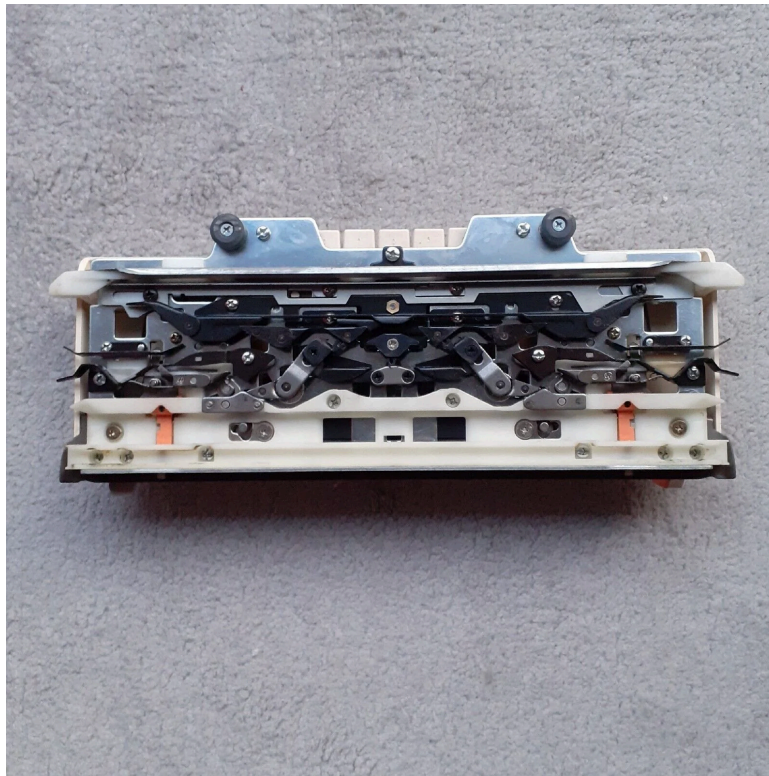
Underside of a knitting machine carriage, photo taken by knitmachineparts.co.uk
